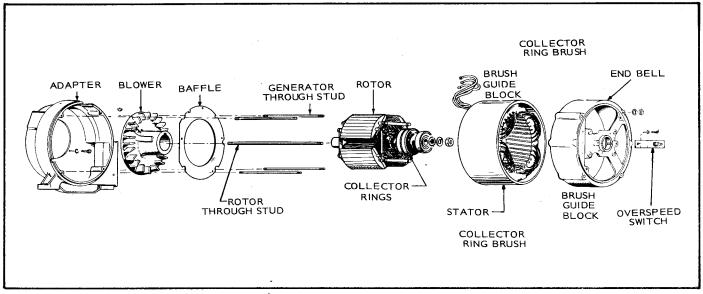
REVOLVING FIELD GENERATOR ASSEMBLY.
